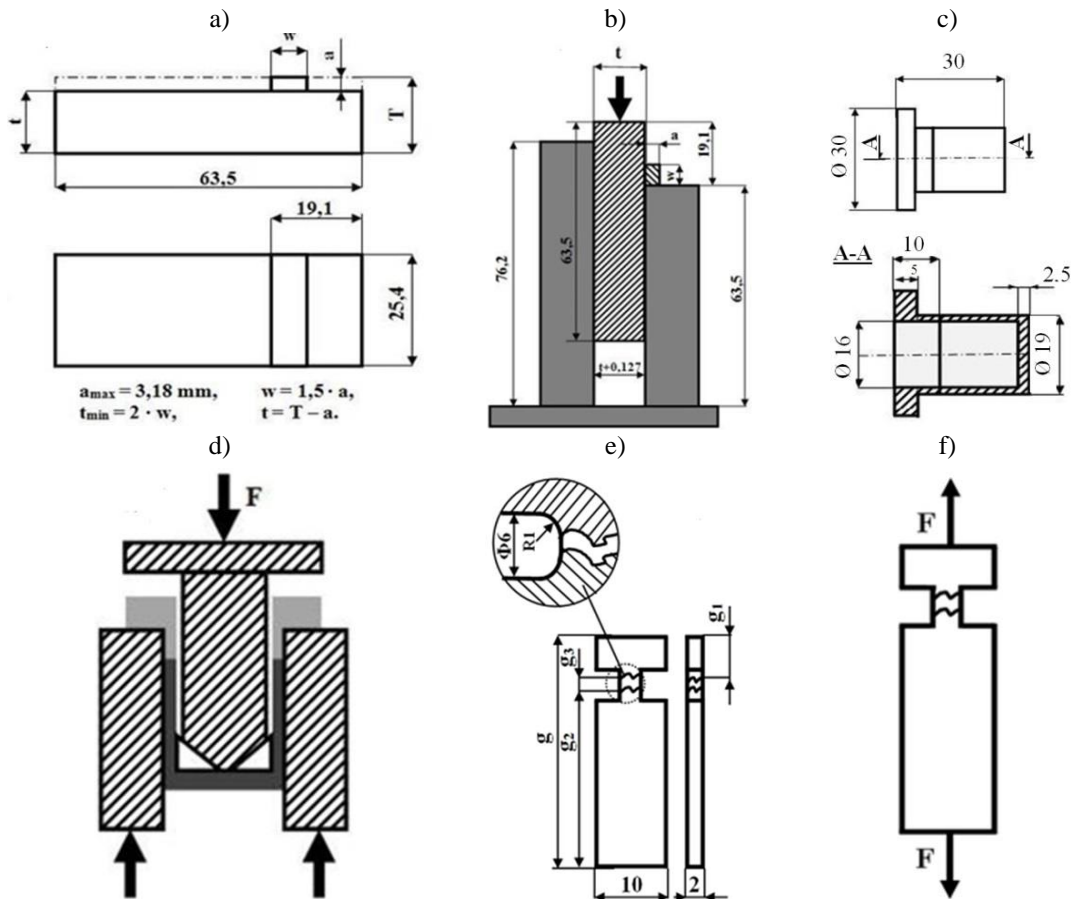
Shape and dimensions of the sample and schematic presentation of the: a-b) shearing test, c-d) peel test e-f) tensile strength test
